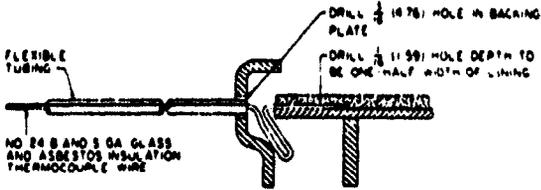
A—DRAWING OF THERMOCOUPLE LOCATION—DRUM BRAKE
